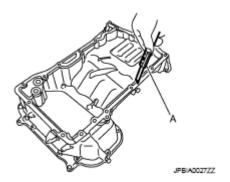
Using Scraper To Remove Old Liquid Gasket From Mating Surface Of Lower Cylinder Block
